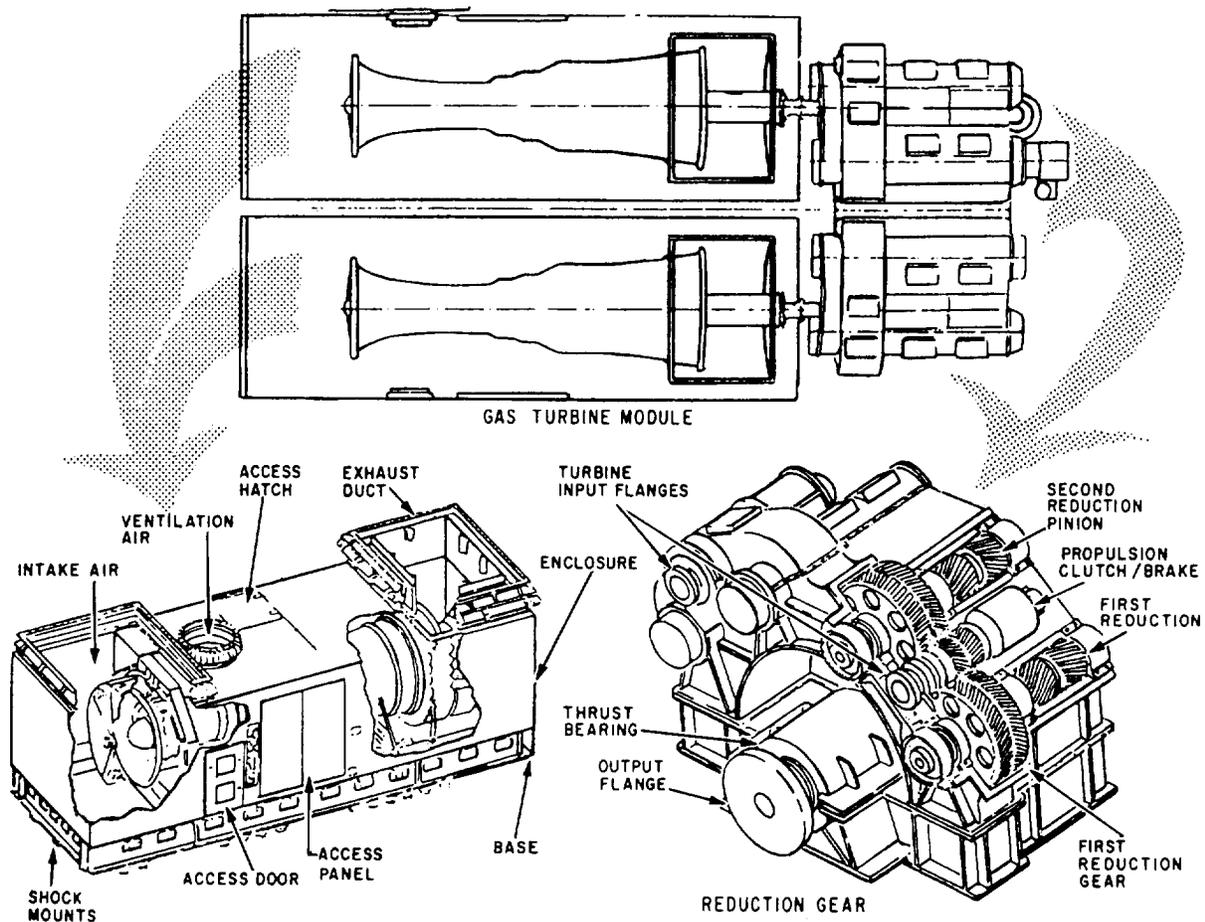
Typical gas turbine reduction gear module arrangement.
